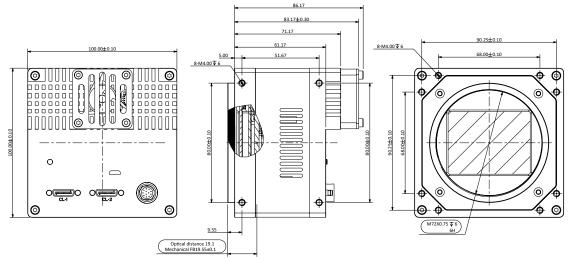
Mechanical Dimensions (in mm) for Cameras with 100 \* 100 \* 66mm housing (M72 interface).
